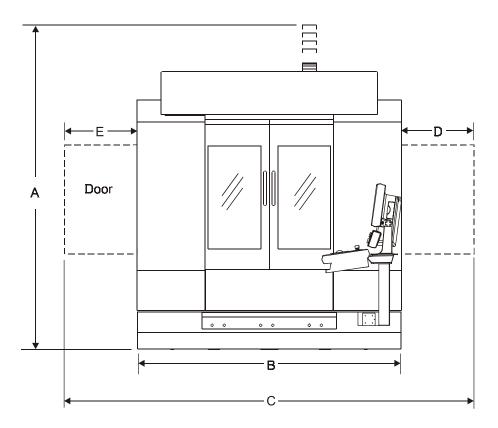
1. VMX Machining Center – Front View (shown with Ultimax 4 console)
